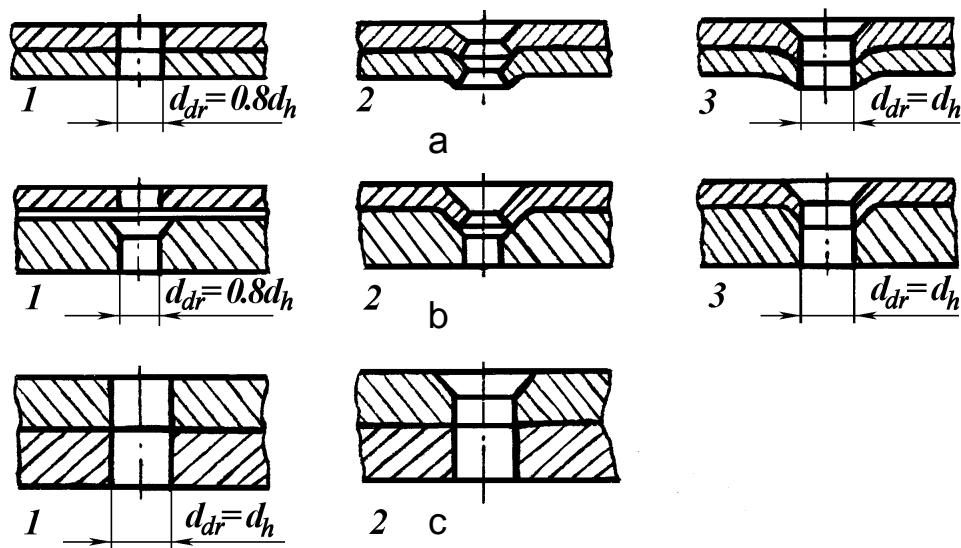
Methods of making of holes for receiving countersunked rivets: a – by punching (dimpling) in both parts; b – by countersinking in the frame and punching in the skin; c – by countersinking in the skin (1 – hole drilling; 2 – hole countersinking; 3 – hole reaming)
